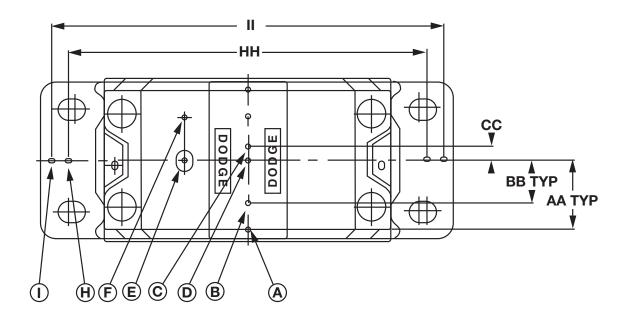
USDAF Housing Dimensional and Descriptive Drawing
